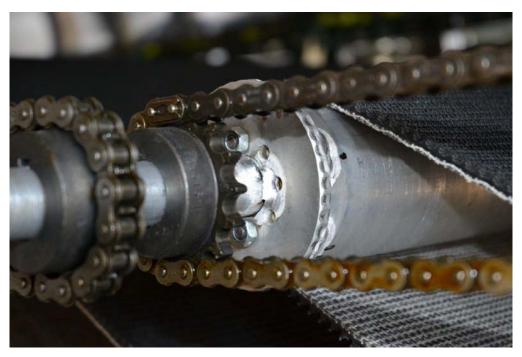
Double sprocket arrangement on opposite side of shaft from motor which was used to transmit drive power from belt #1 to all the other belts. The rough-top belt surface is also visible in this photo.
